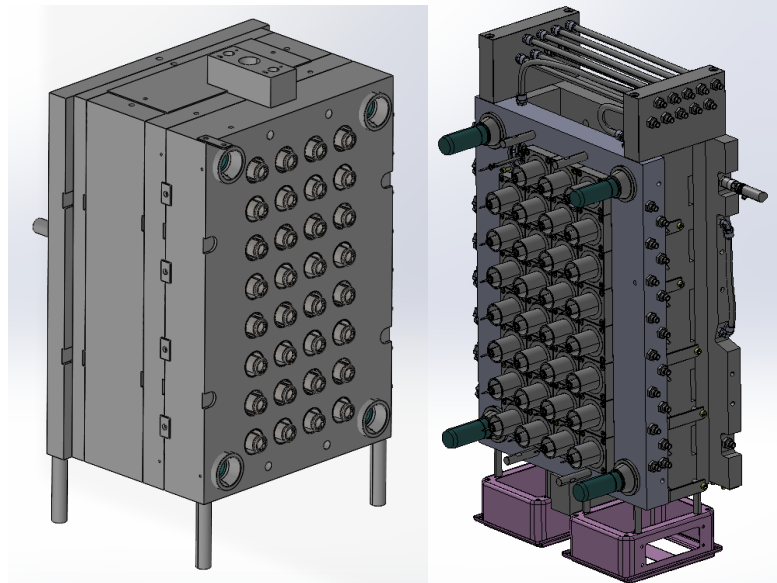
Mold 0637 with the component 12, (a) movable half, (b) fix half.
